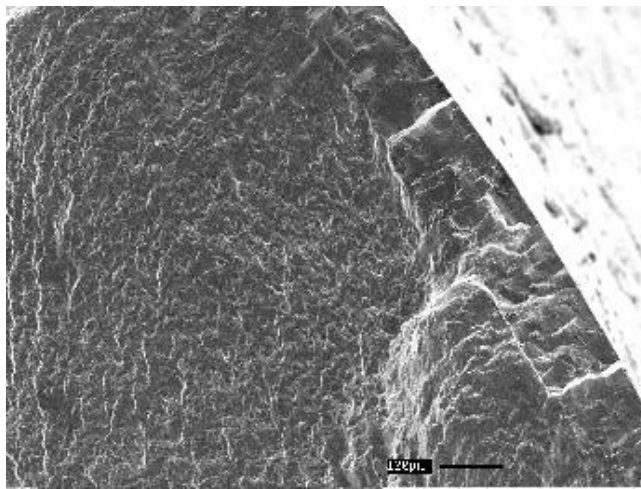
Fracture surface from a bending fatigue specimen electroplated with hard chromium and fatigue tested
